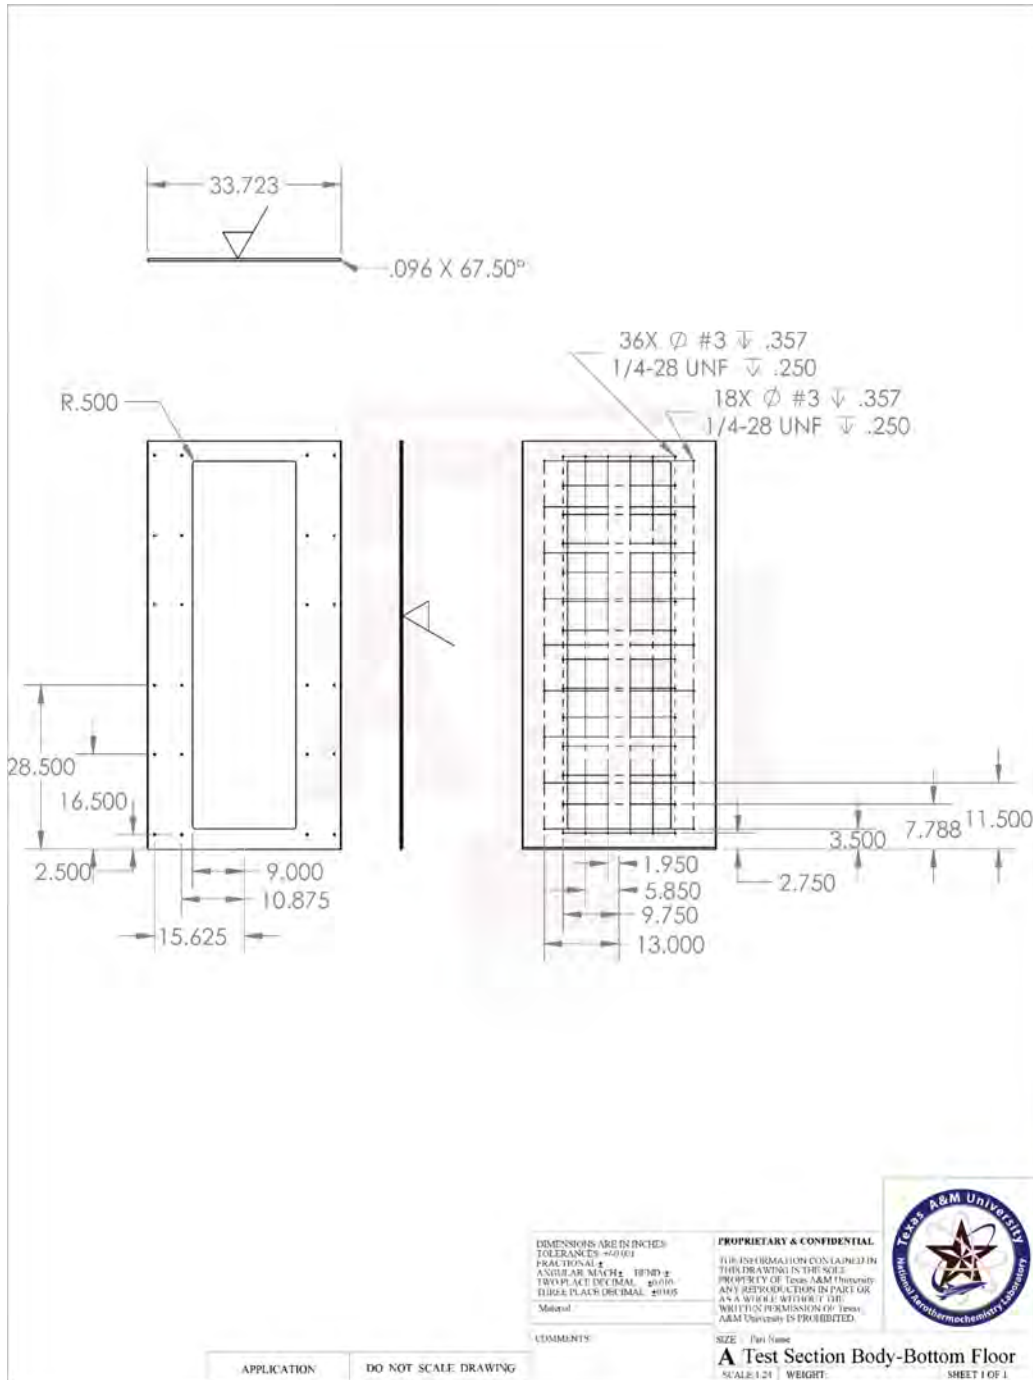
DIMENSIONAL DRAWING FOR THE FLOOR ACCESS PLATE OF THE TEST SECTION SKELETON.
